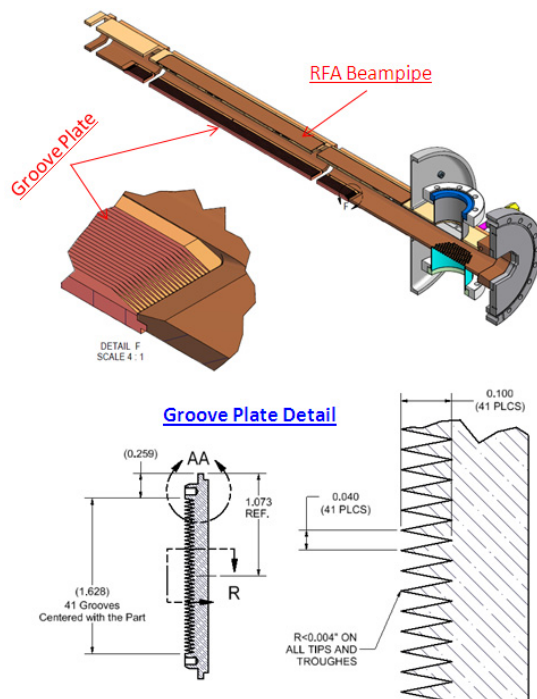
RFA SCW beampipe with a copper grooved plate. The groove plate has 41 triangular grooves of 1-mm spacing, and is integrated to the bottom beampipe via E-beam weld.
